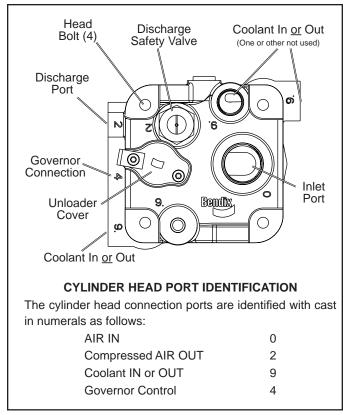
STANDARD BENDIX® BA-921® COMPRESSOR CYLINDER HEAD
